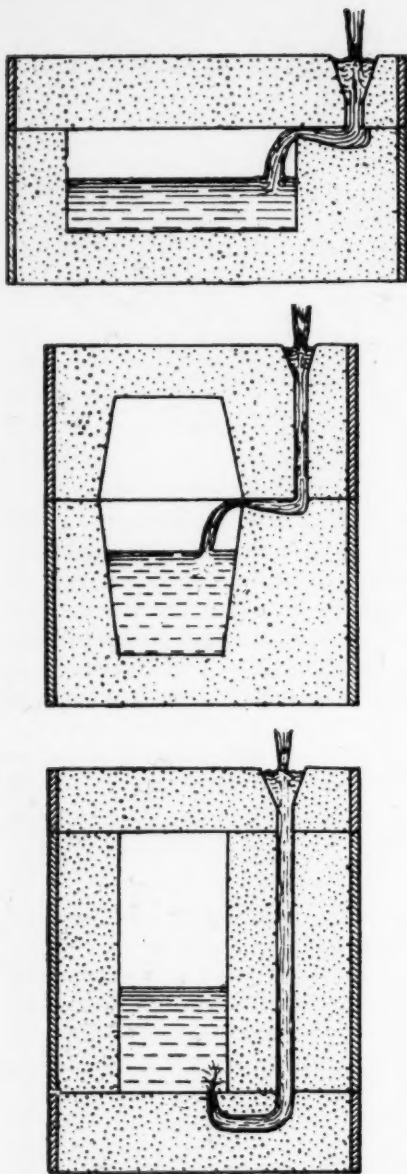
Positioning of ingates to break the flow of metal before entering the mold cavity. (Top) Used at the top of the mold. (Center) Used in the middle of the mold. (Bottom) Used in the bottom of the mold.
